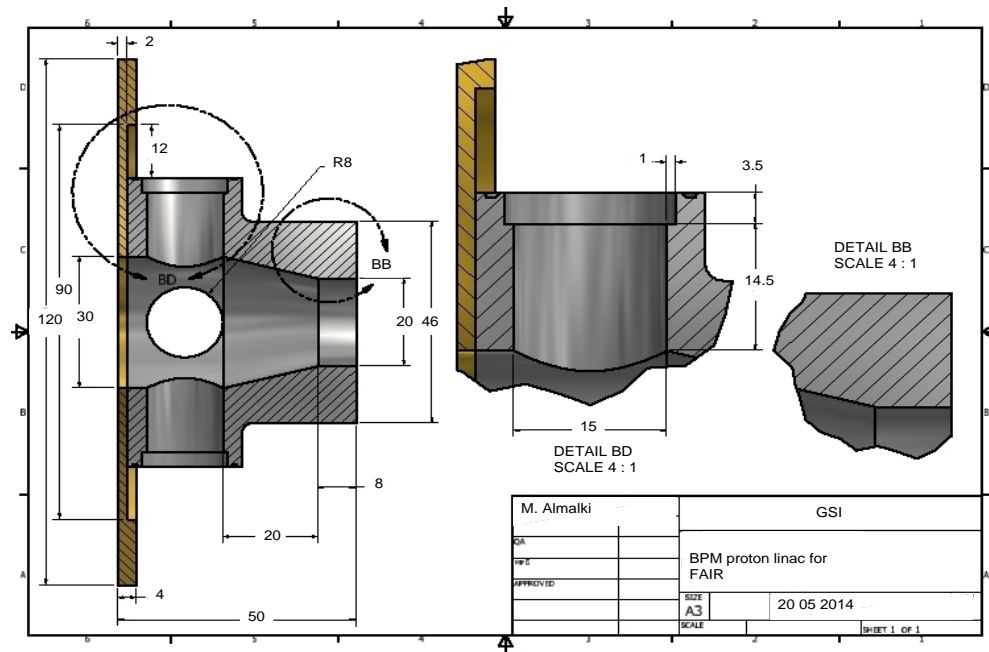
CAD drawing in mm unit of the BPM housing and the flange
